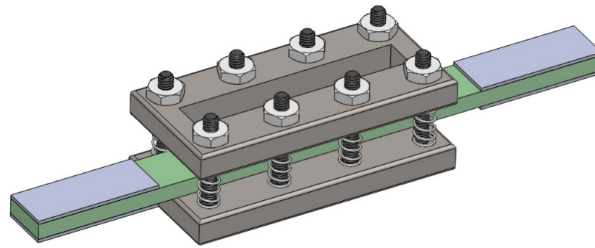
Windowed anti-buckling fixture for rectangular fatigue specimens.
